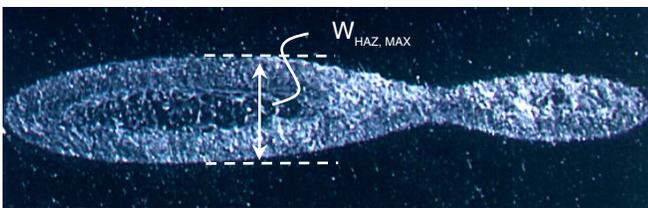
Weld and melt-pool profile for a lap / shear joint (See Table 4)
